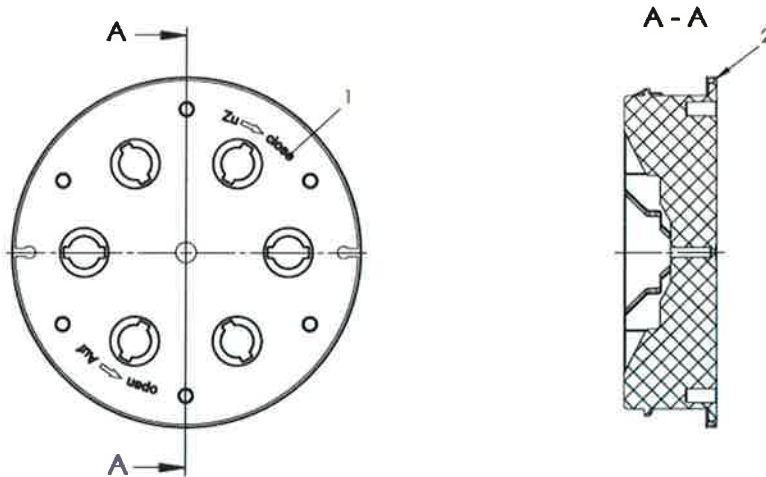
Detail of the system cover Hauff HSI150-DT - manufacturer's drawing.
